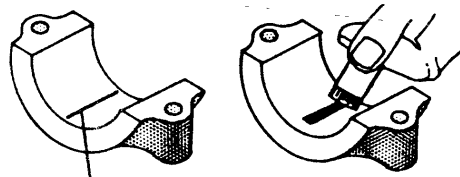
, Crankpin Journal and Connecting Rod Cap Clearance
